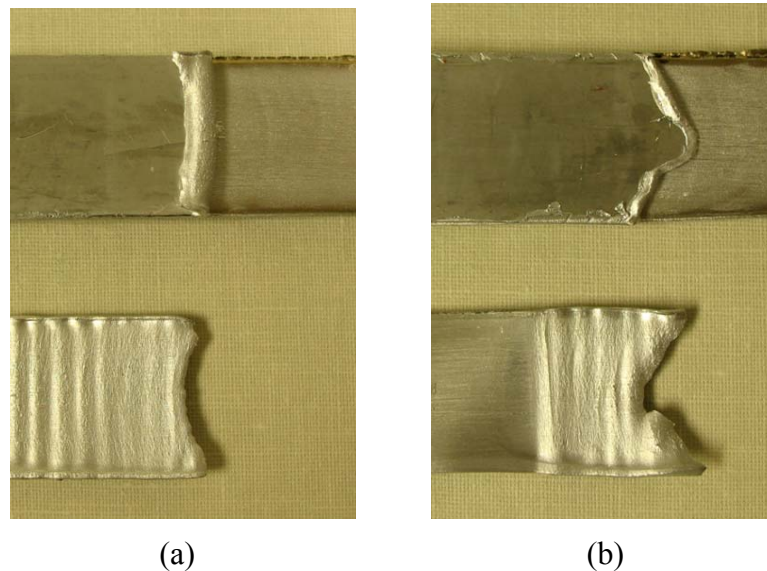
The fracture modes in peel test of roll bonded metal sheets with strong bond
